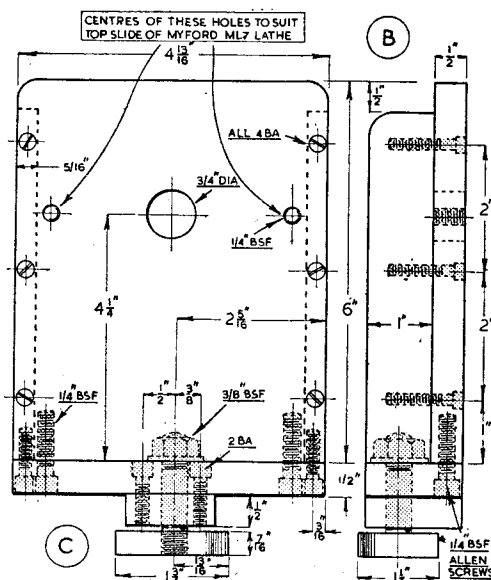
Constructional details of the bed bracket ("B") and the clamp plate ("C")
